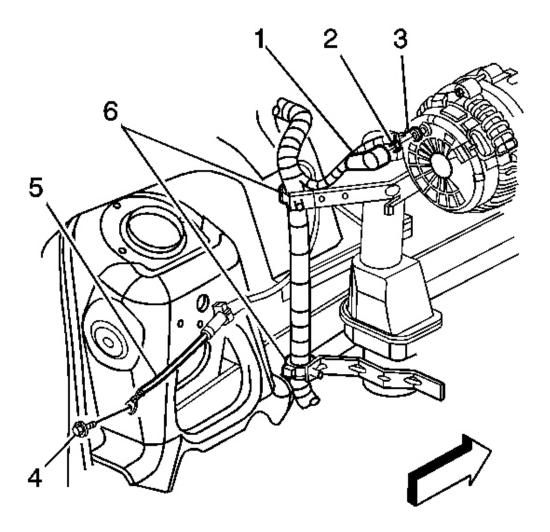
Identifying Battery Cable Components Courtesy of GENERAL MOTORS CORP.
